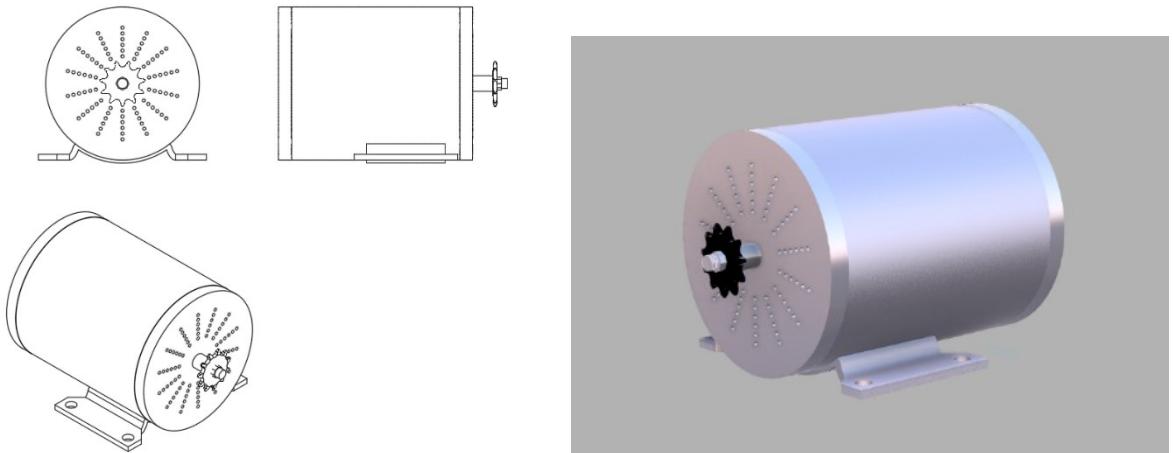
CAD model of my motor: BLDC (3000W/72V)
